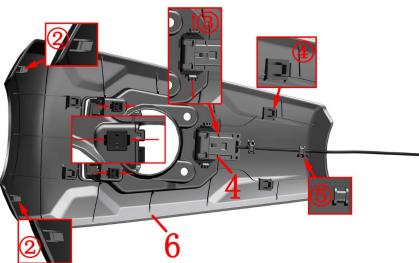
FUEL TANK COMPONENT		Fuel Tank middle cover assembly	CHK	(0)
